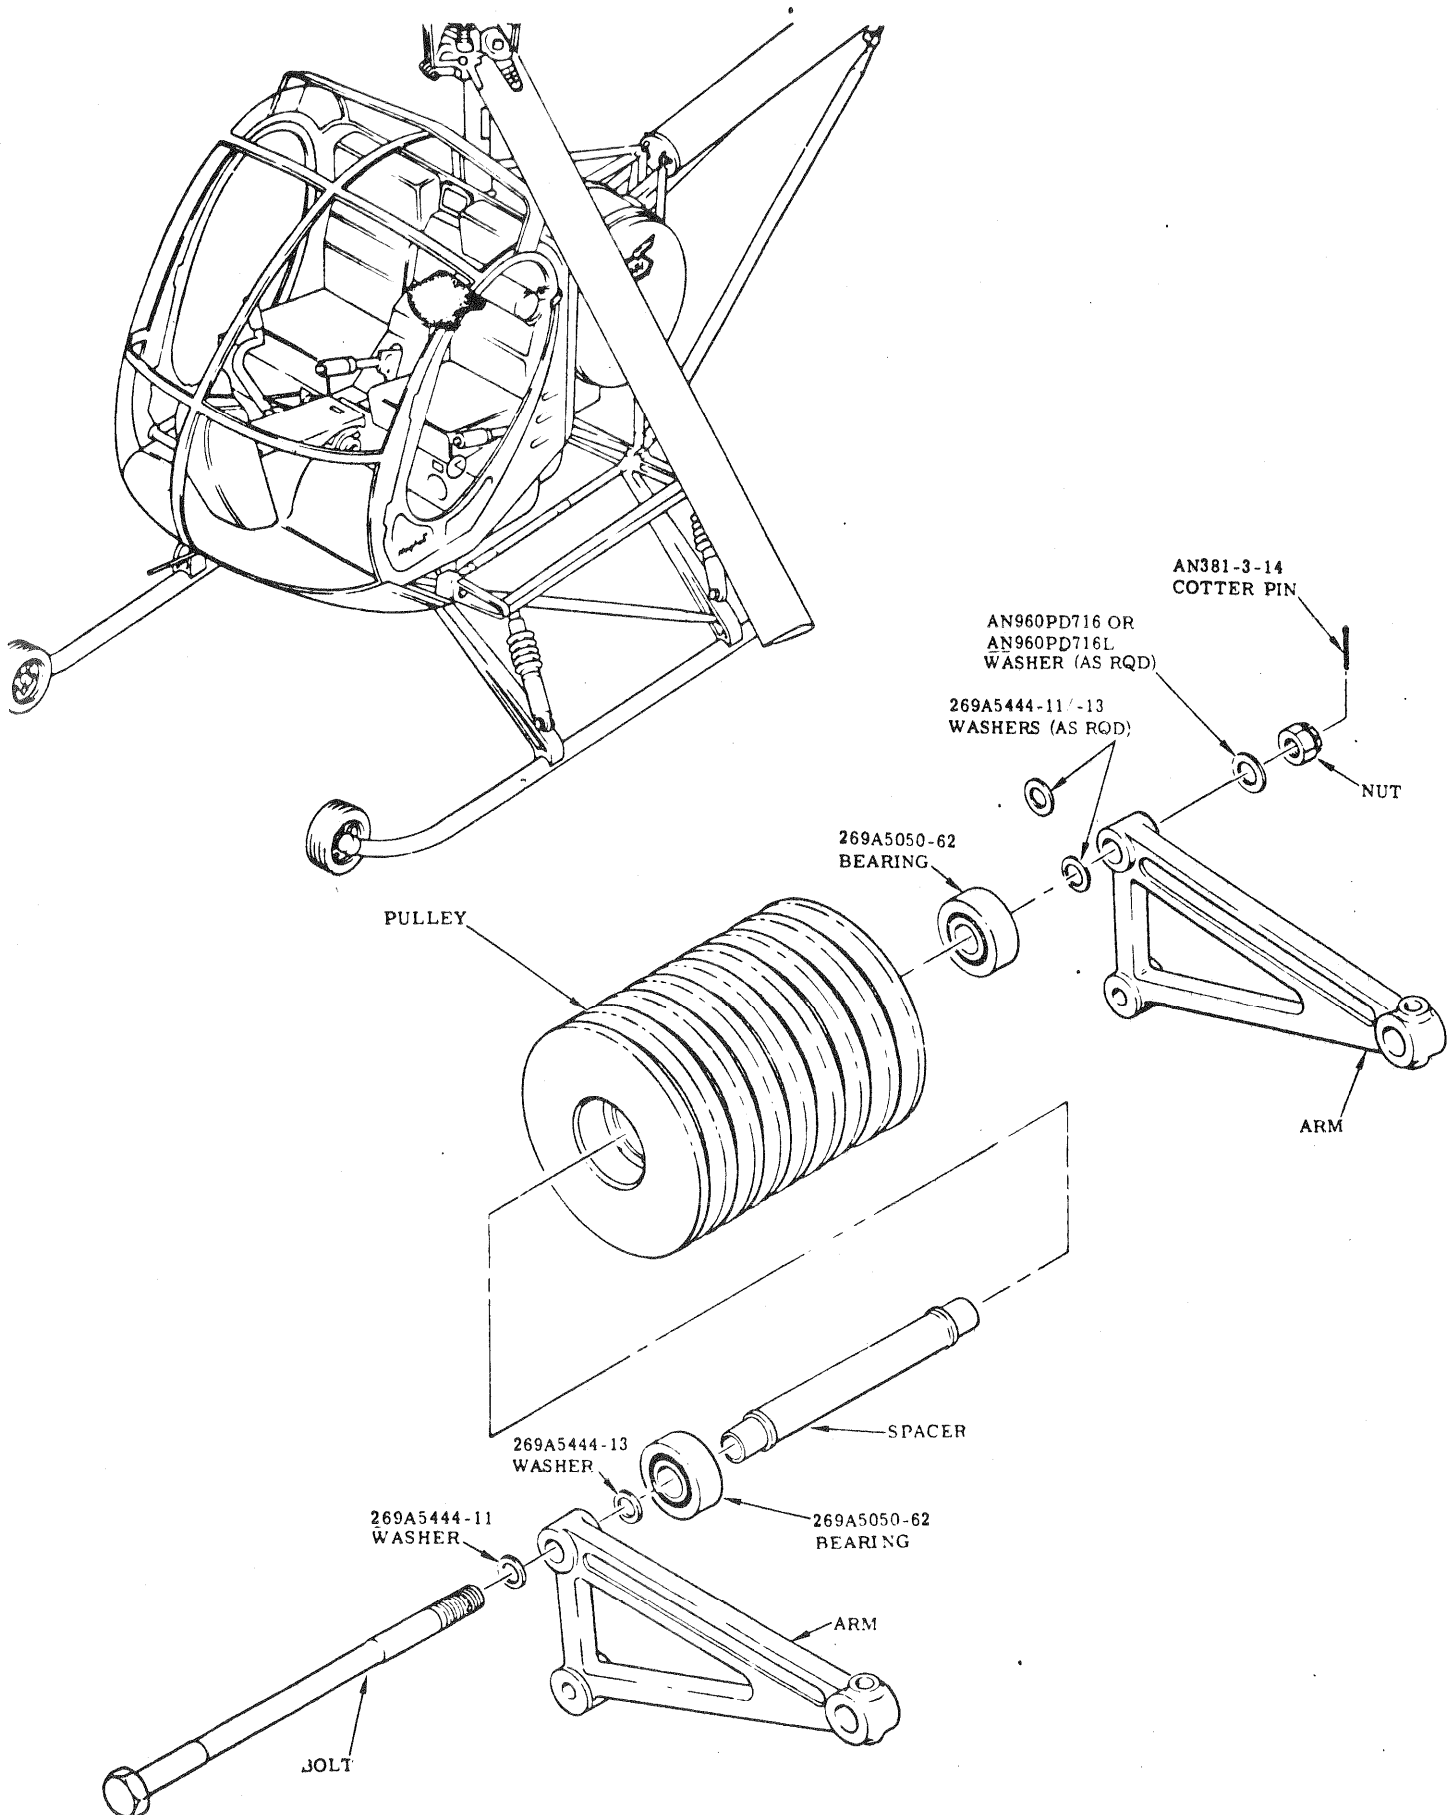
BELT DRIVE IDLER PULLEY ASSEMBLY
